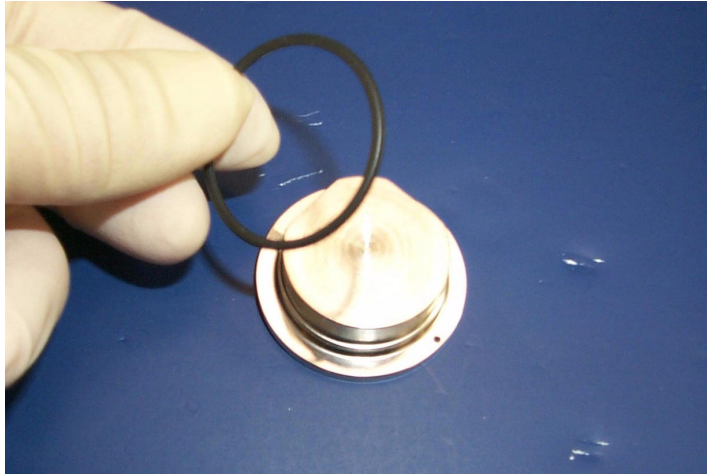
Removing the O-ring from Magnetic Pole Piece
